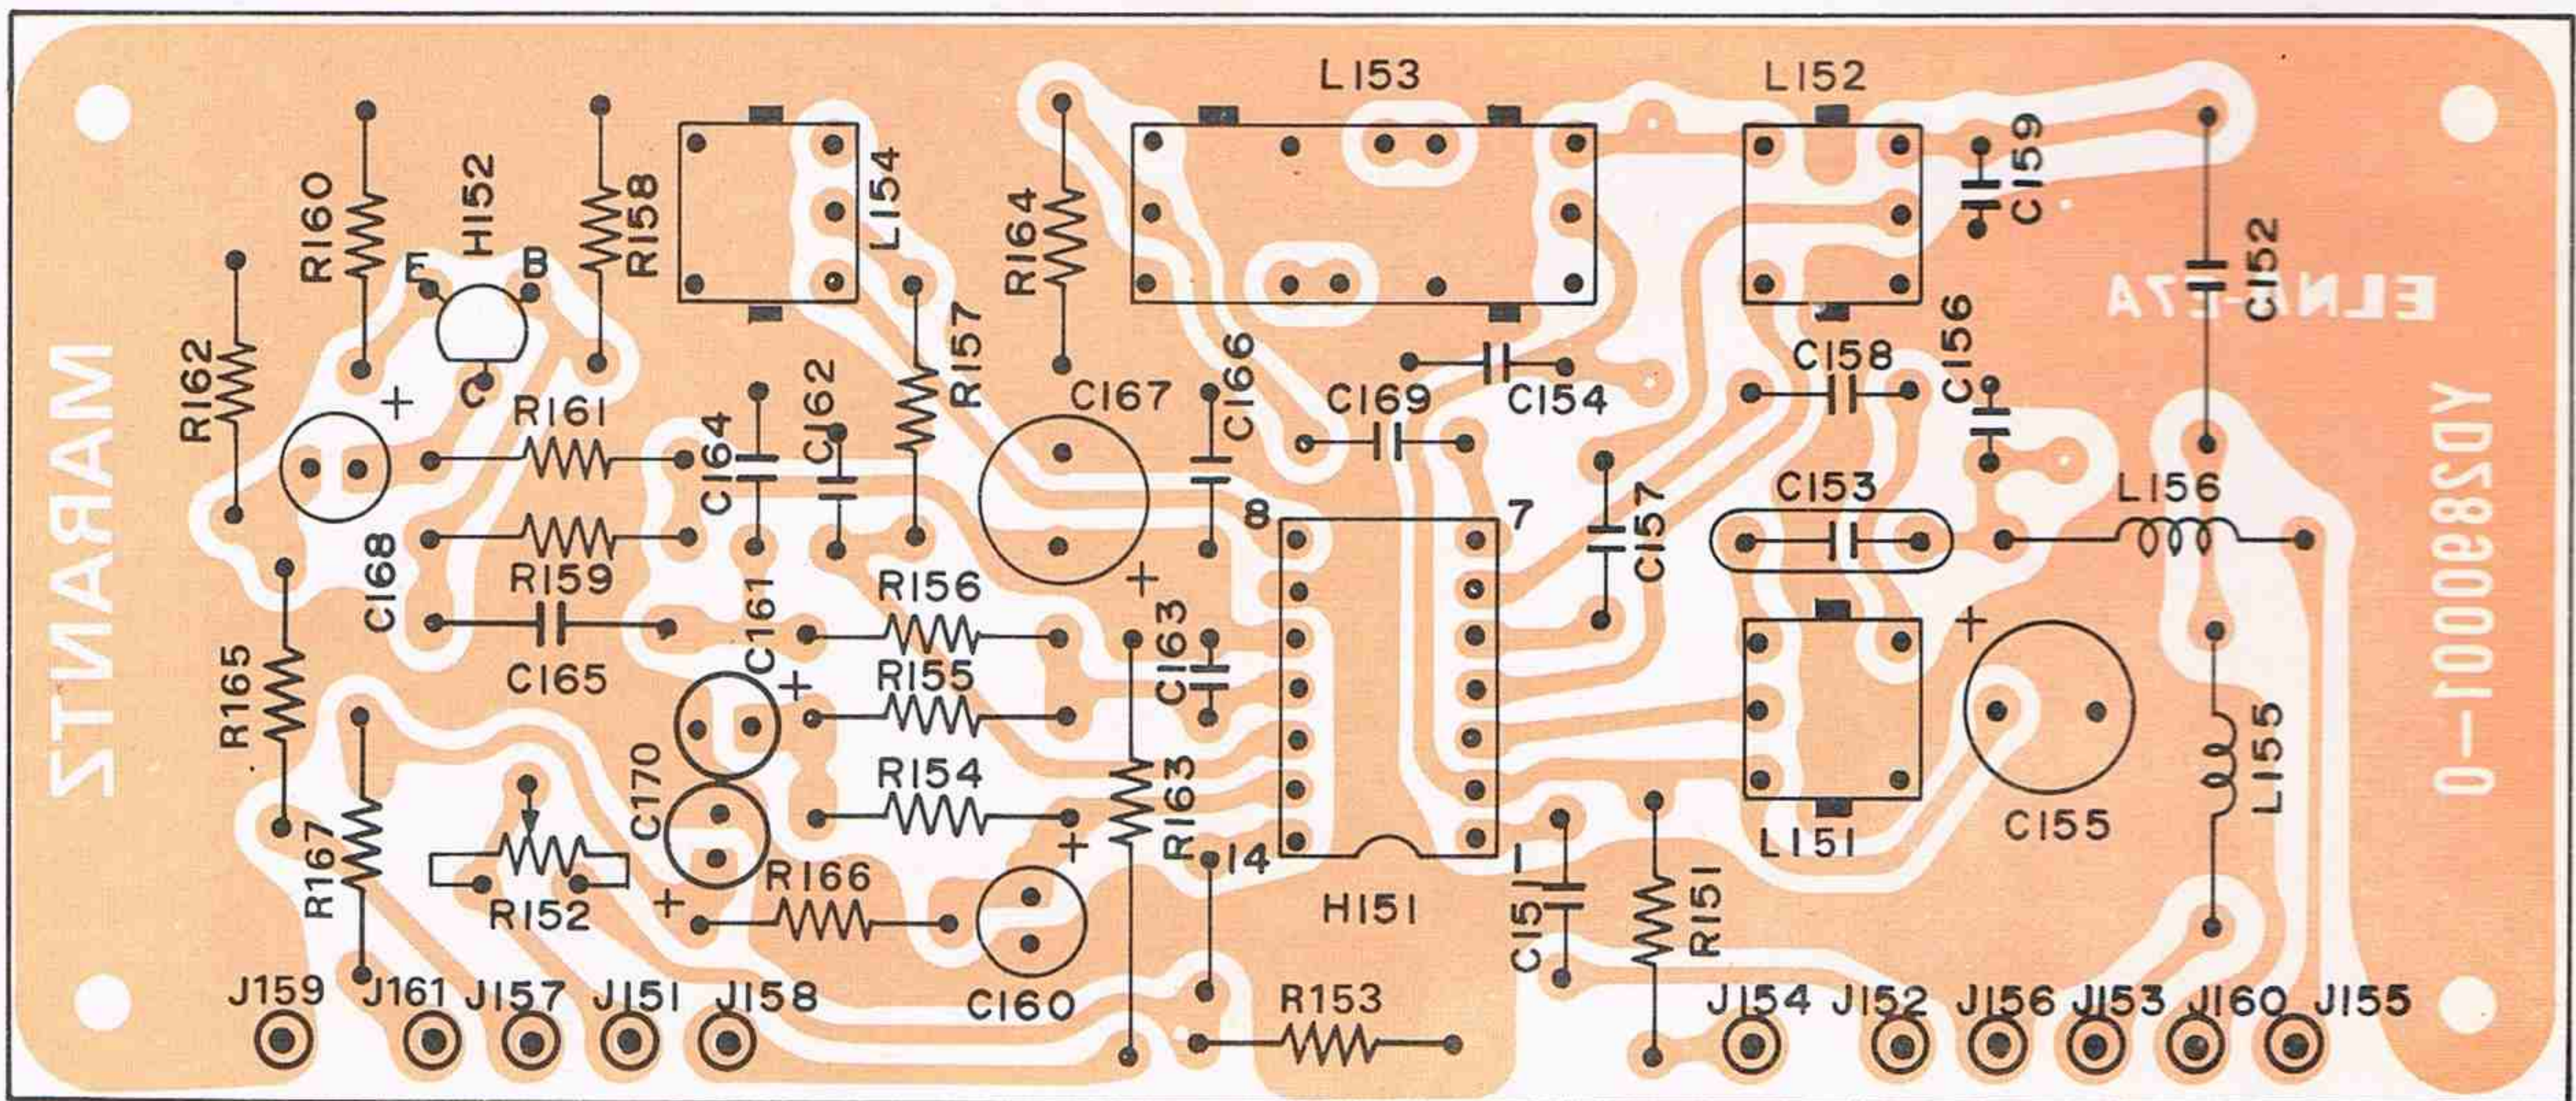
AM Tuner Unit Assembly P150 Component Locations
